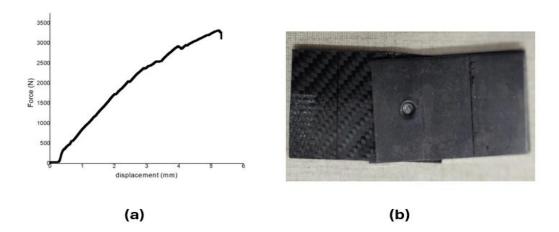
a) Shear test result b) Failed sample after shear test for weld time of 0.25sec
